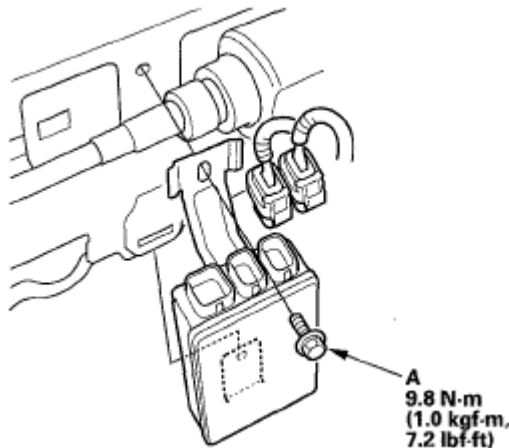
Identifying Front Passenger's Weight Sensor Unit And Fastener With Torque Specifications
